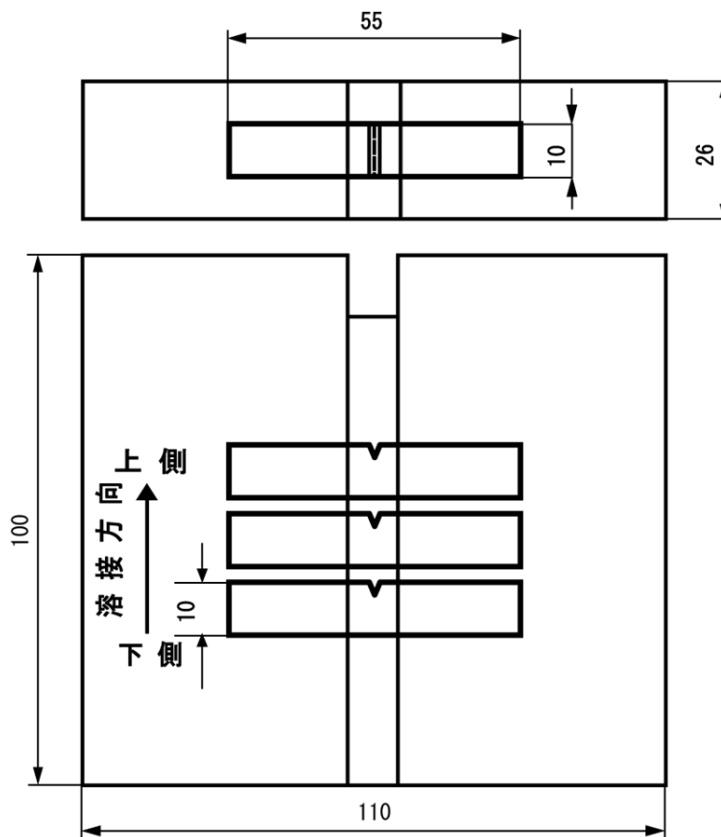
Cutting plan of welded specimen for the Charpy impact test.
